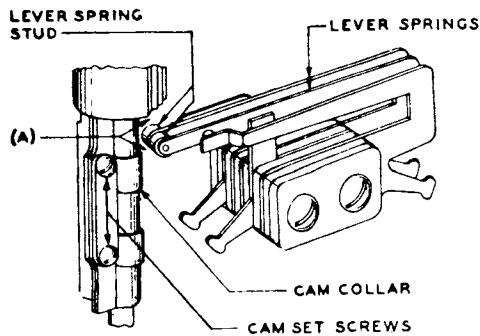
Clearance between lever spring bushing and rotary hub and cam collar.
